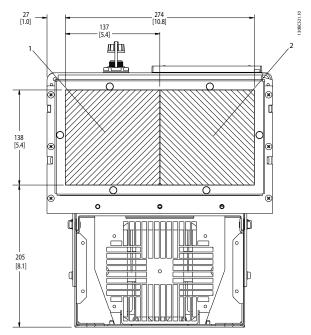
D1h, Bottom View 1) Mains Side 2) Motor Side
